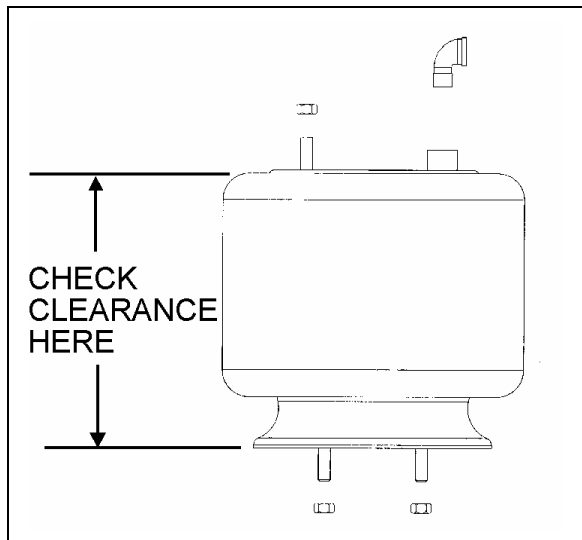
TYPICAL AIR SPRING CLEARANCE 16058
